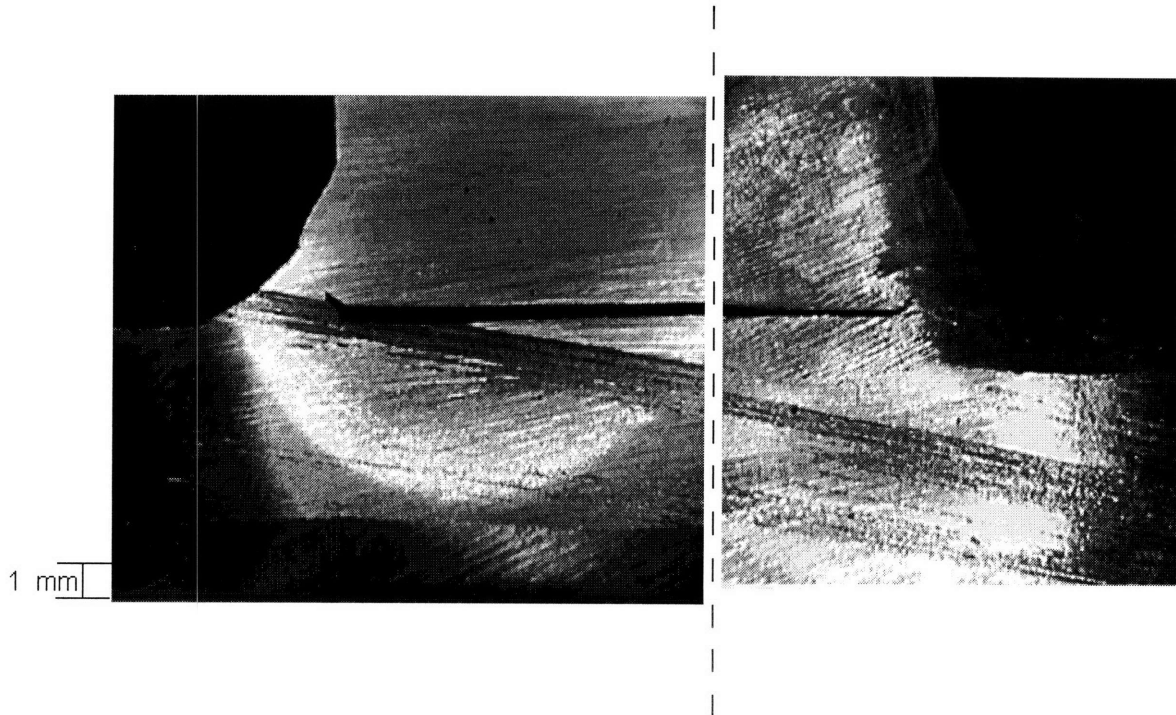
Specimen 2 cross sectional view of the fillet weld after fracture.
